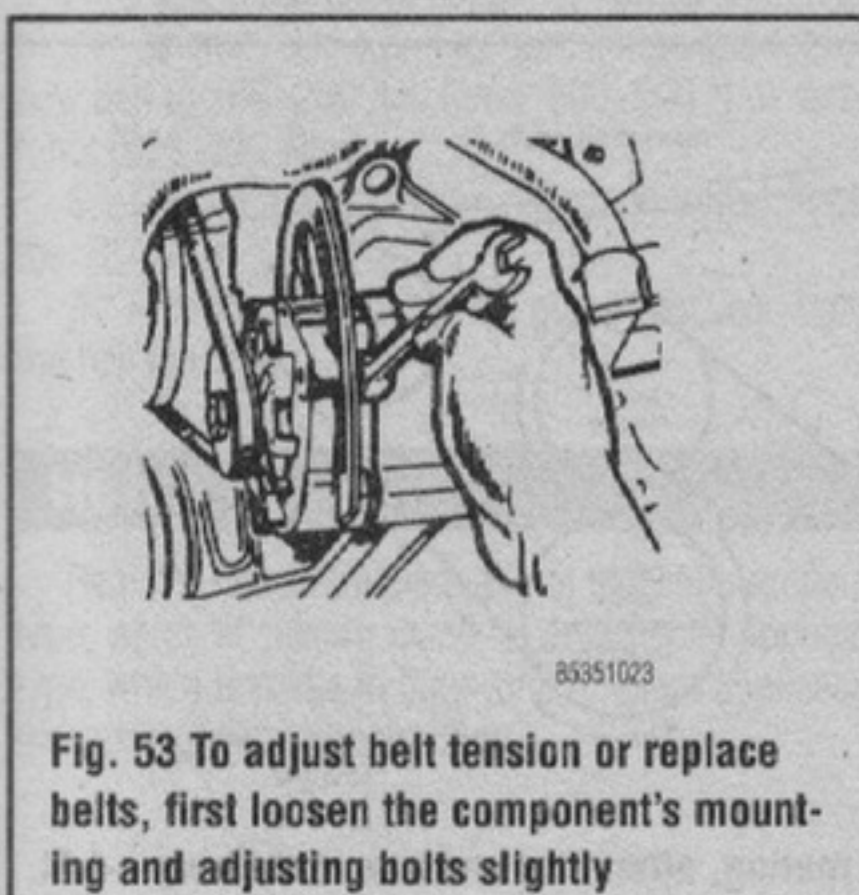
To adjust belt tension or replace belts, first loosen the component's mounting and adjusting bolts slightly
